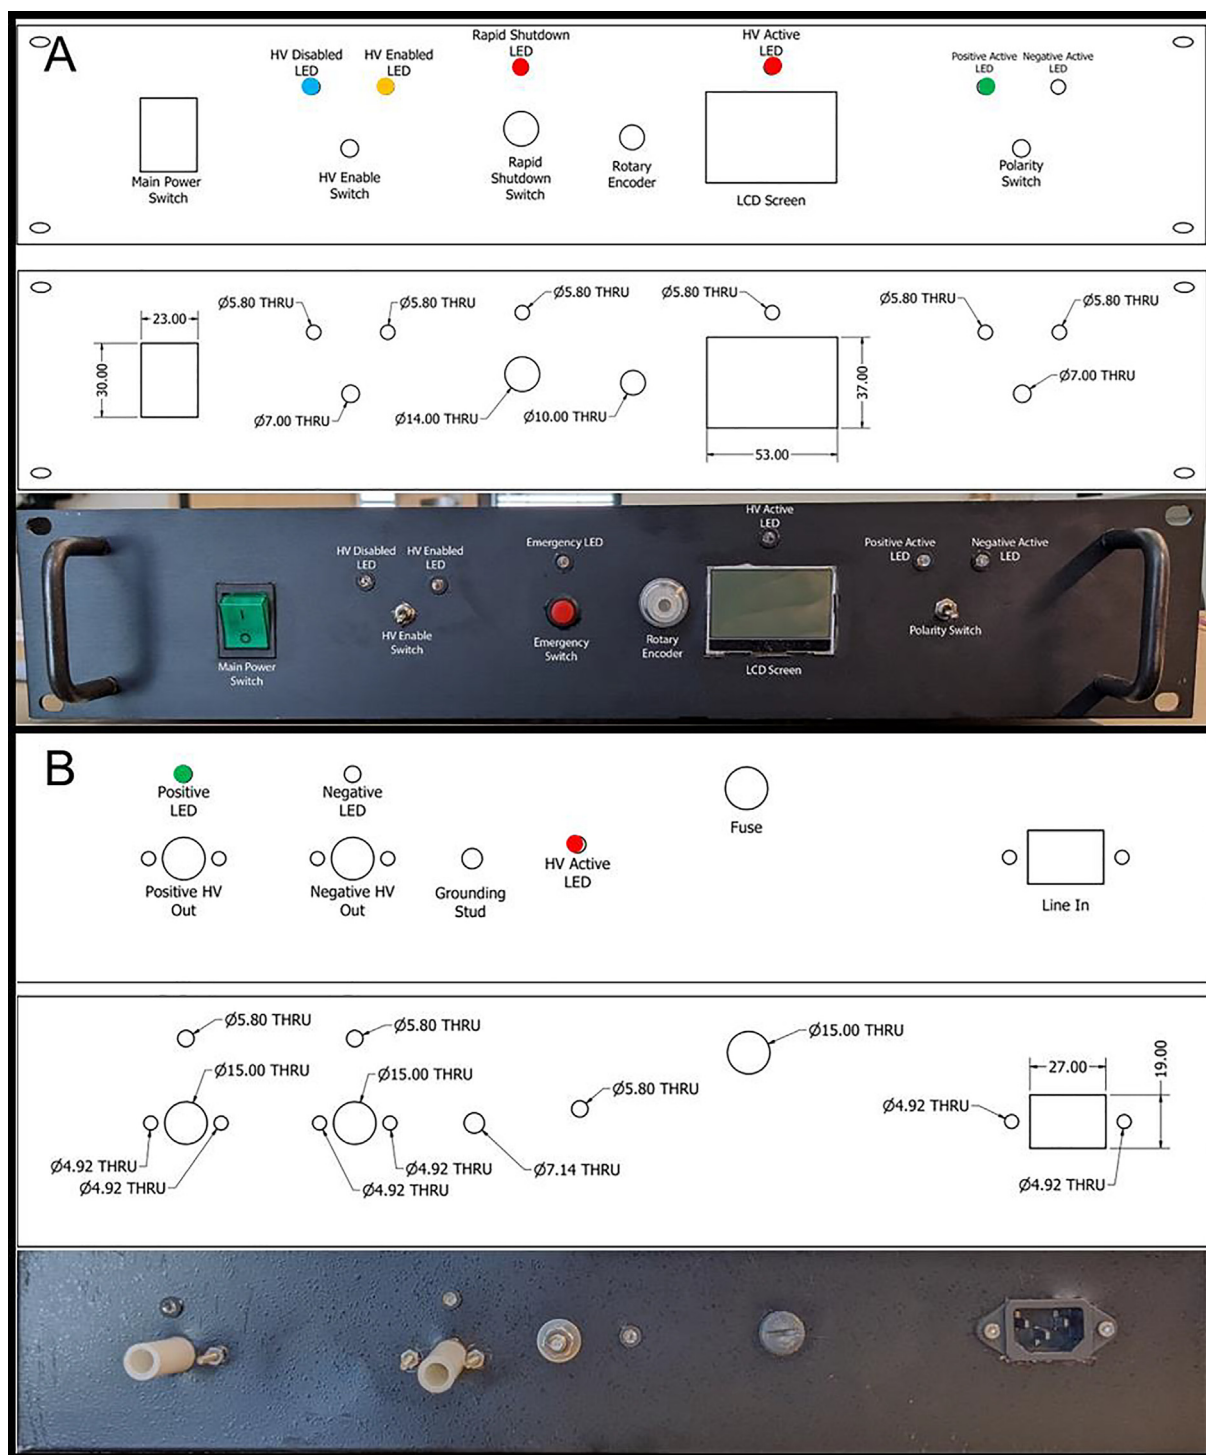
Panel labeling (top), cutout (middle), and photograph of completed panel (bottom) for both Front (A) and Rear (B) panels.
